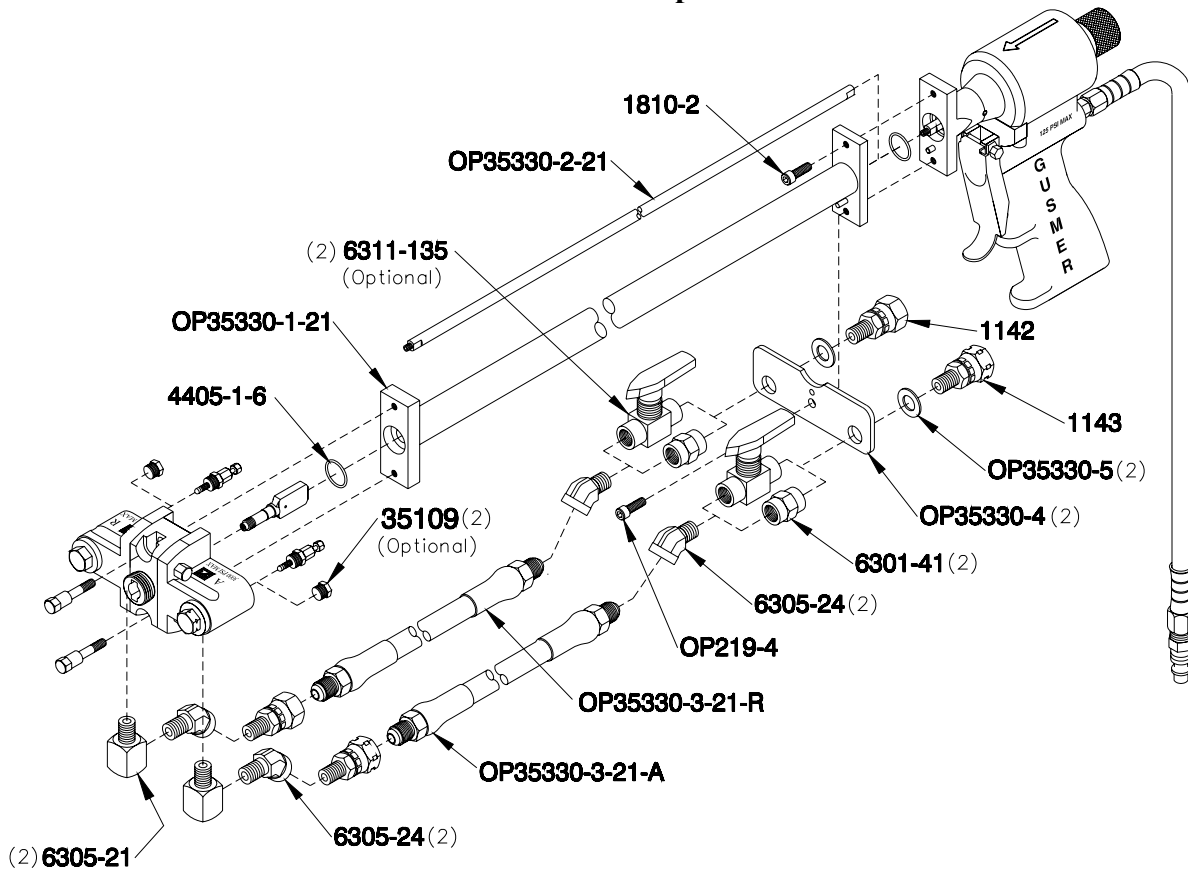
GAP Wand Assembly (Part No. OP35330-21-PKG), Exploded View
